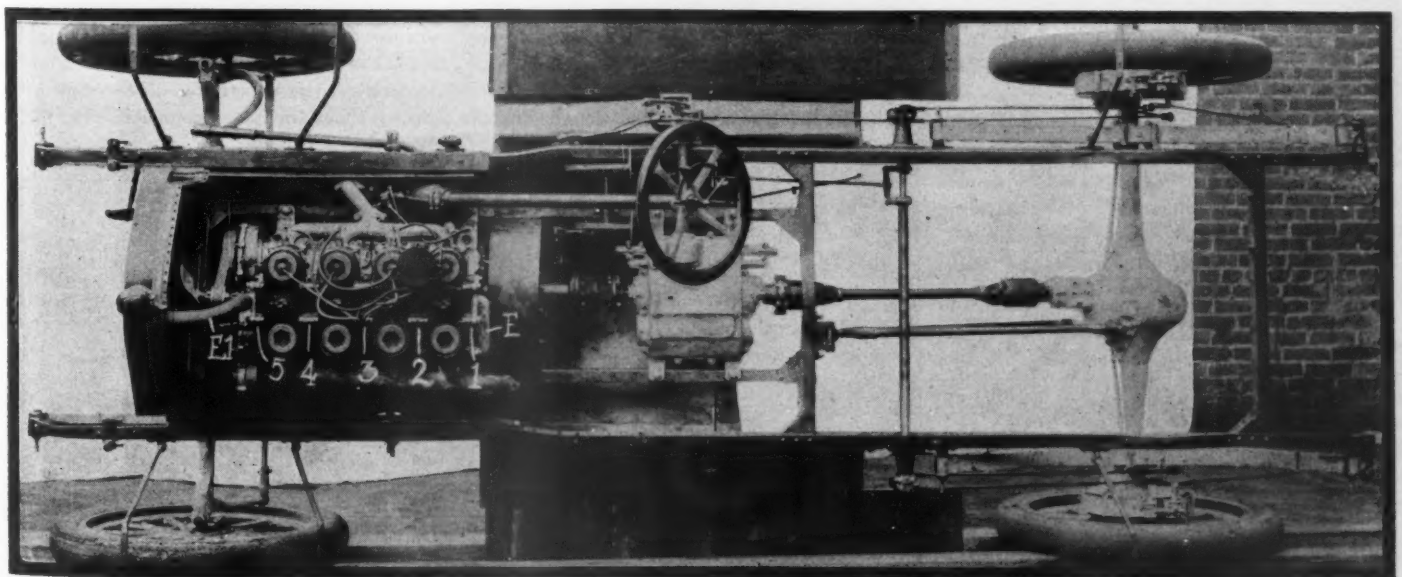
CHASSIS OF PULLMAN MOTOR SHOWING IT TO BE A THREE-UNIT DESIGN, THE MOTOR, GEARBOX AND REAR AXLE BEING SEPARATE UNITS WITH UNIVERSAL JOINTS BETWEEN THEM
